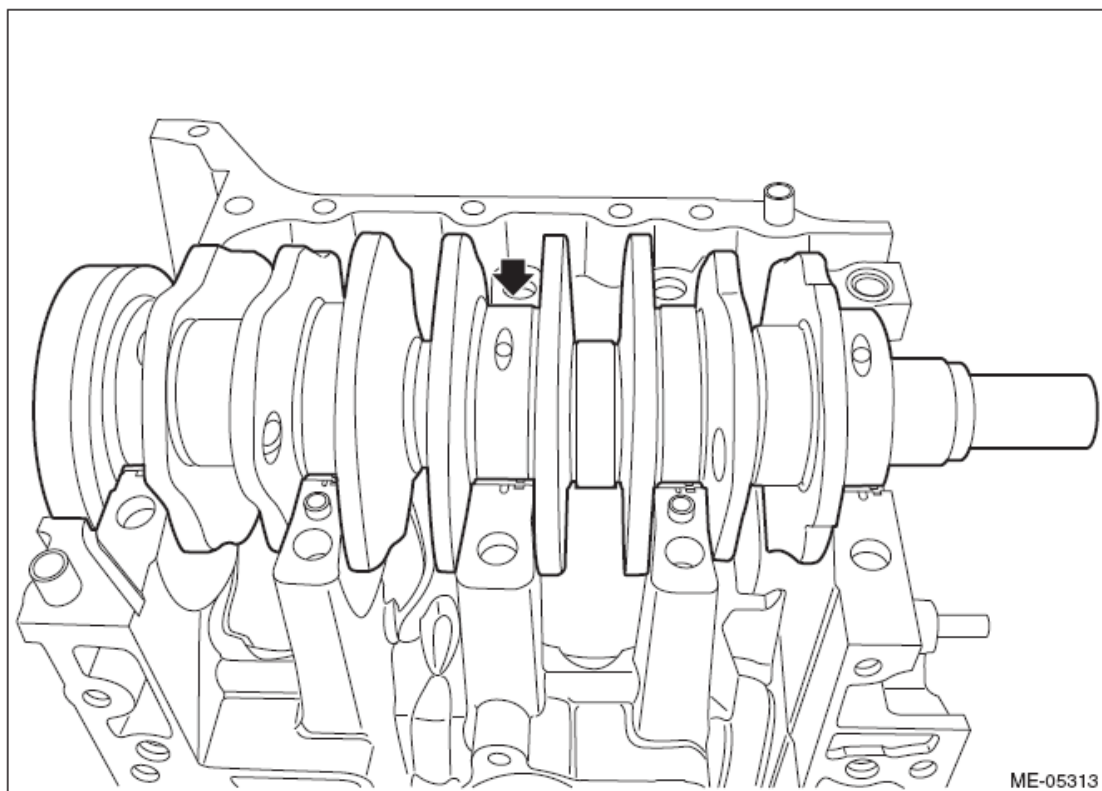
Locating Crankshaft Journal Engine Oil Applying Area
